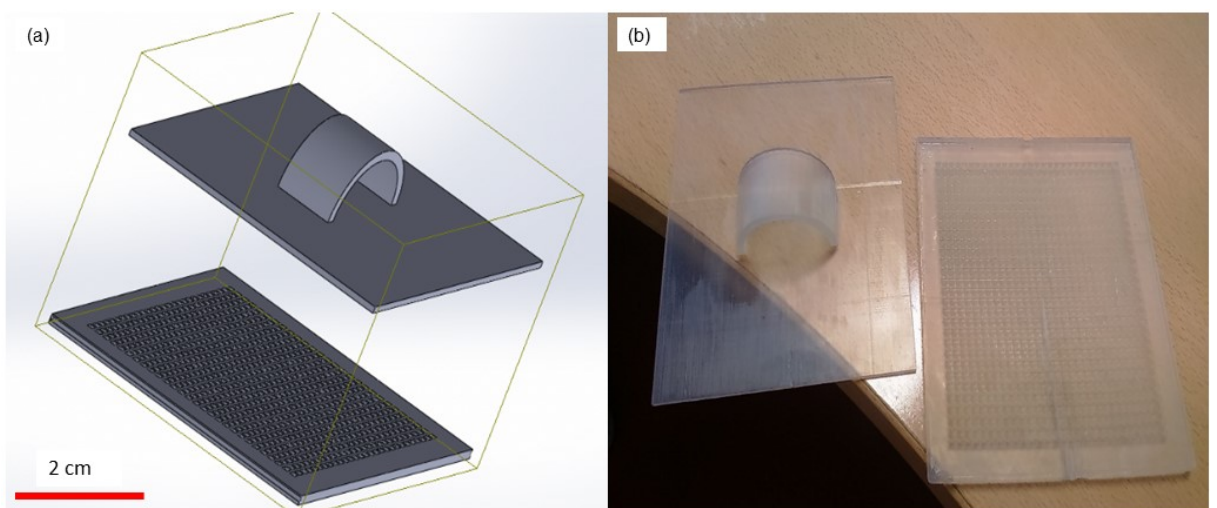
3D design of mold components to fabricate the upper electrode with the structured dielectric layer. a) The mold design at CAD software, b) The Mold after 3D printing
